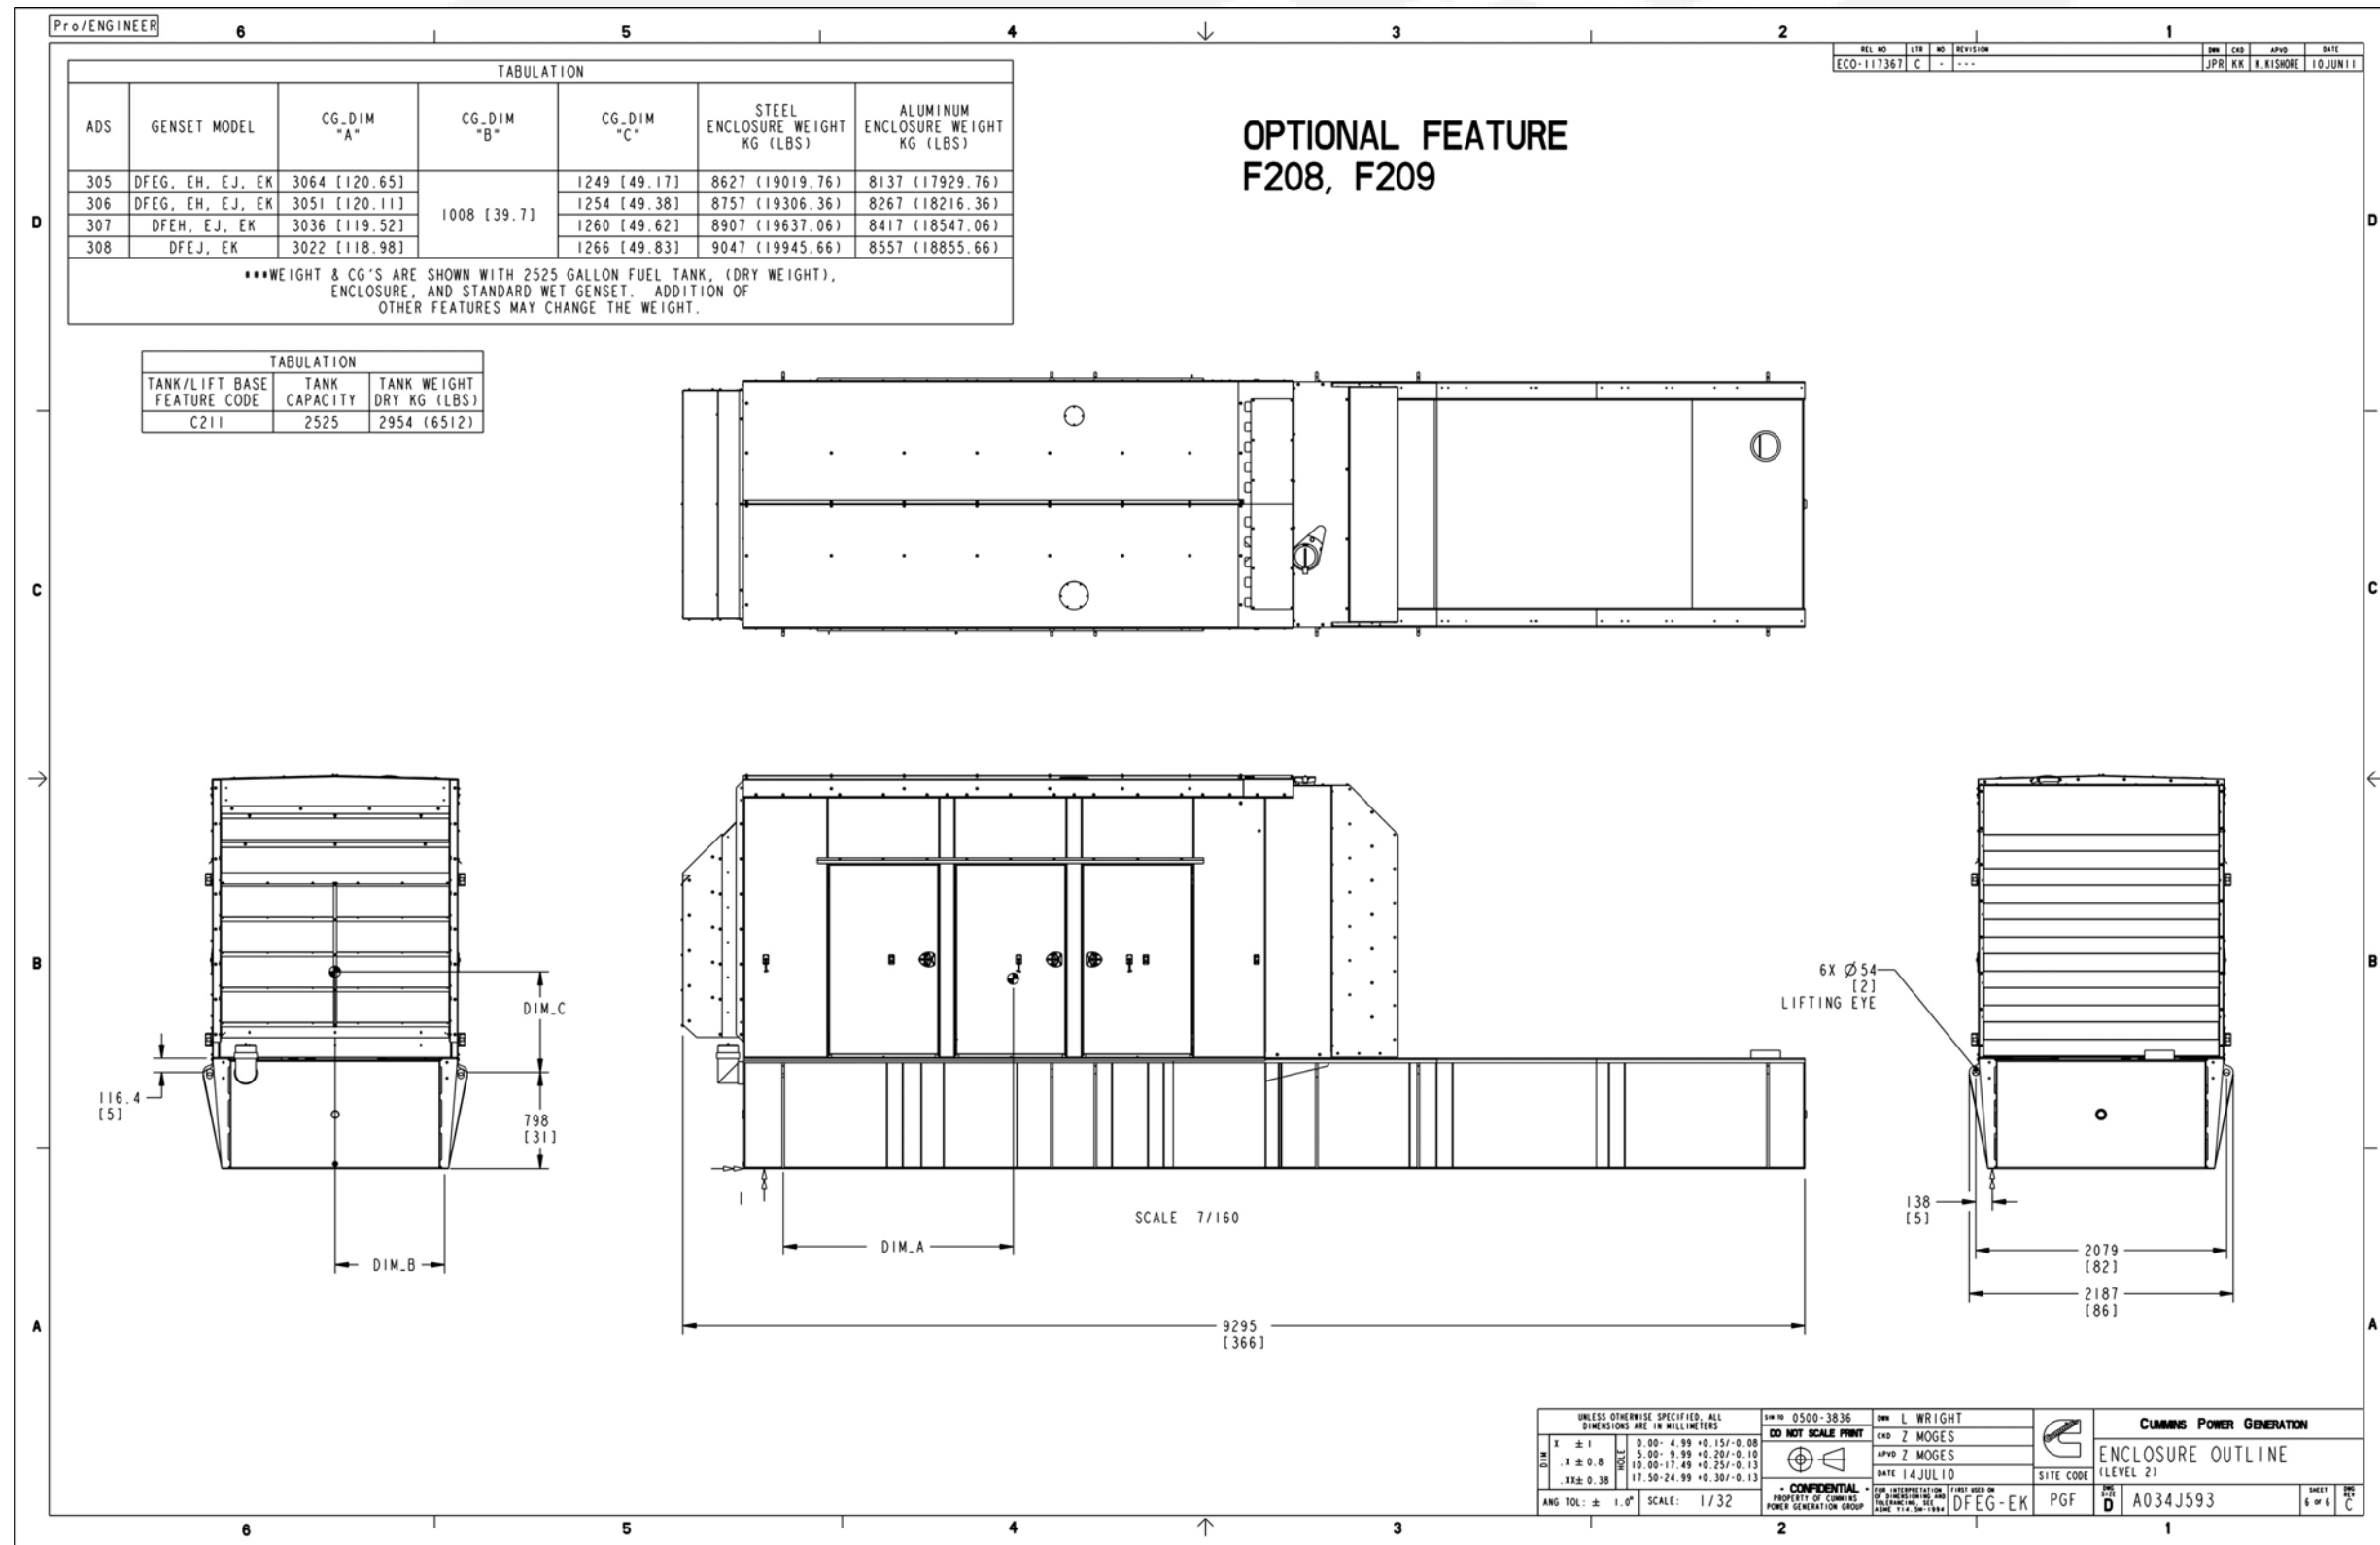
ENCLOSURE OUTLINE DRAWING (F202, F205, F206, F208, F209) (SHEET 6)
